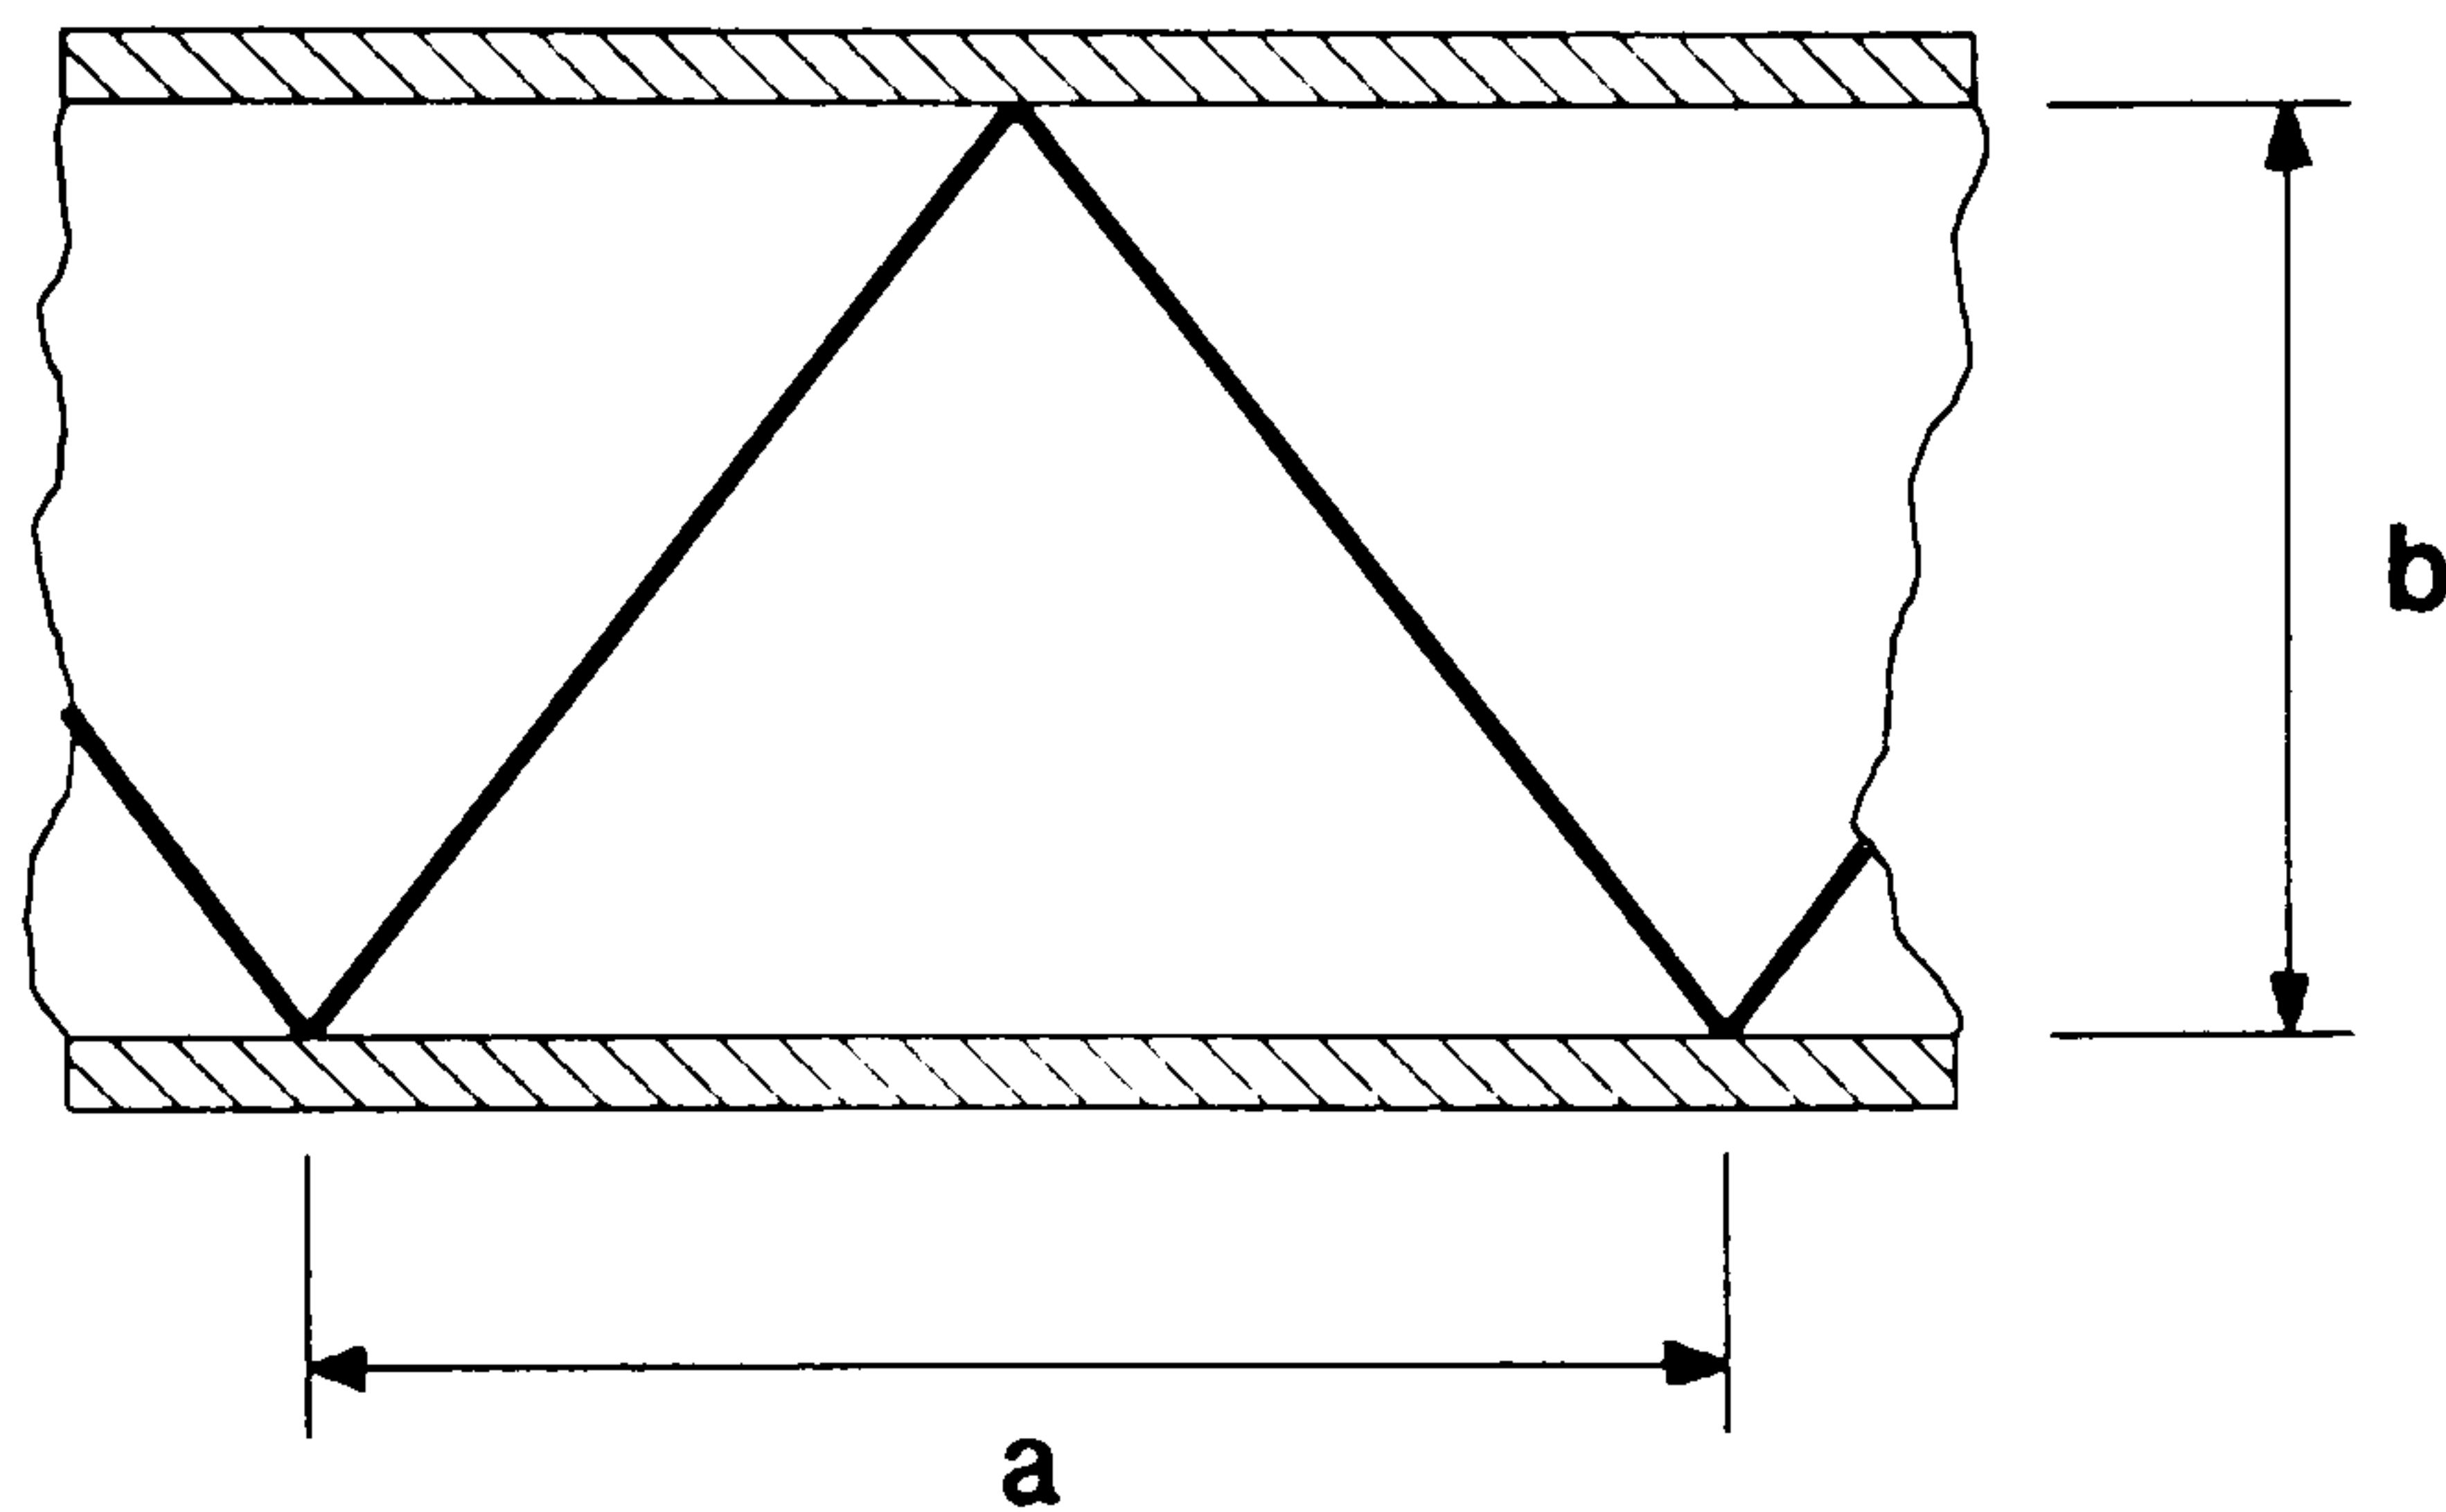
Cross-section through a finned oil tube in an oil cooler
